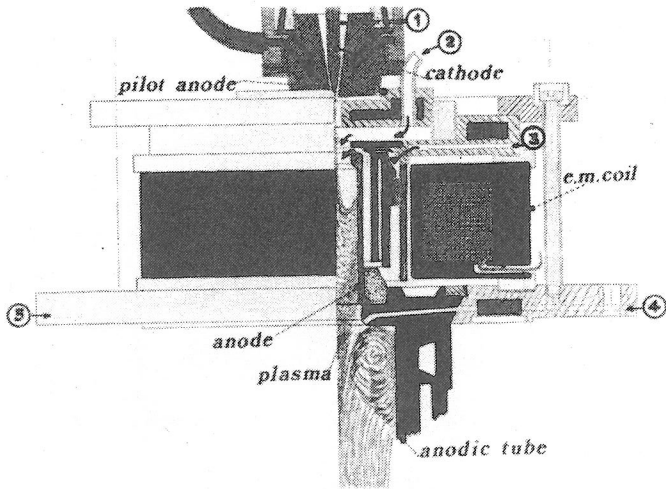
ANODIC ASSEMBLY WITH INJECTION NOZZLES
